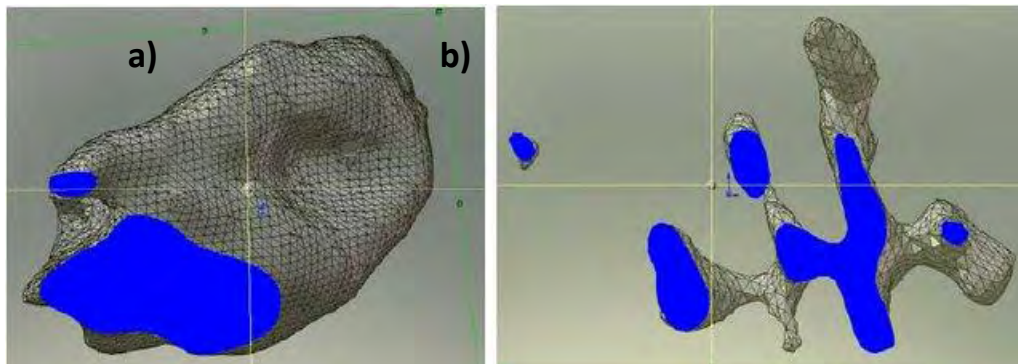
[6] (a) Gas pore (b) Shrinkage pore in section view
